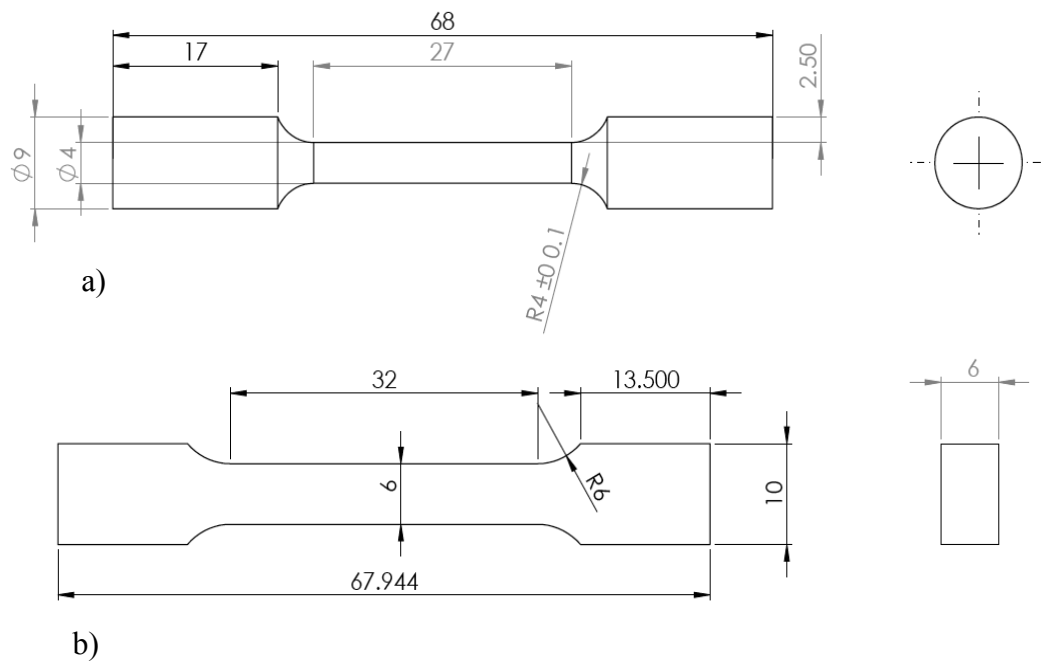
Dimensions of sub size tensile samples: a) Round, b) Flat. All dimensions are shown in mm.
